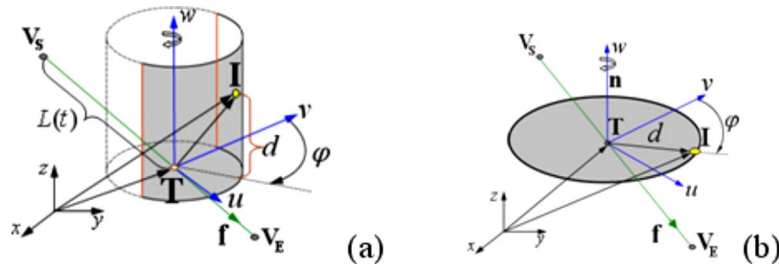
Engagement regions of the (a) cylindrical and (b) flat contact faces for the flat end mill
